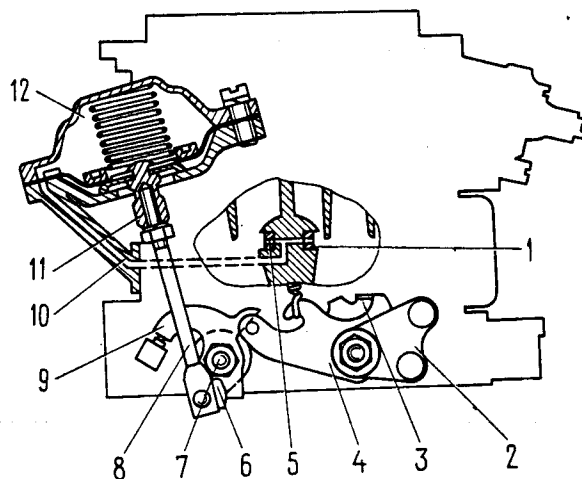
Secondary Throttle Valve Operating Mechanism of Carburetors 2107-1107010-10 and 2107-1107010-20:
